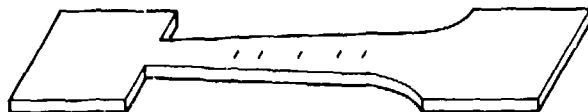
Flexural fatigue specimen, illustrating location of surface cracks which have been seeded using ink dots.
